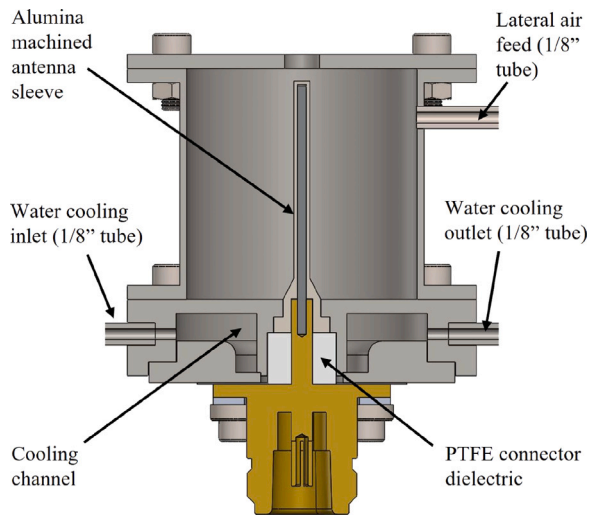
Cross-section design of refined AMPCAT prototype, with machined alumina antenna sleeve shown.
